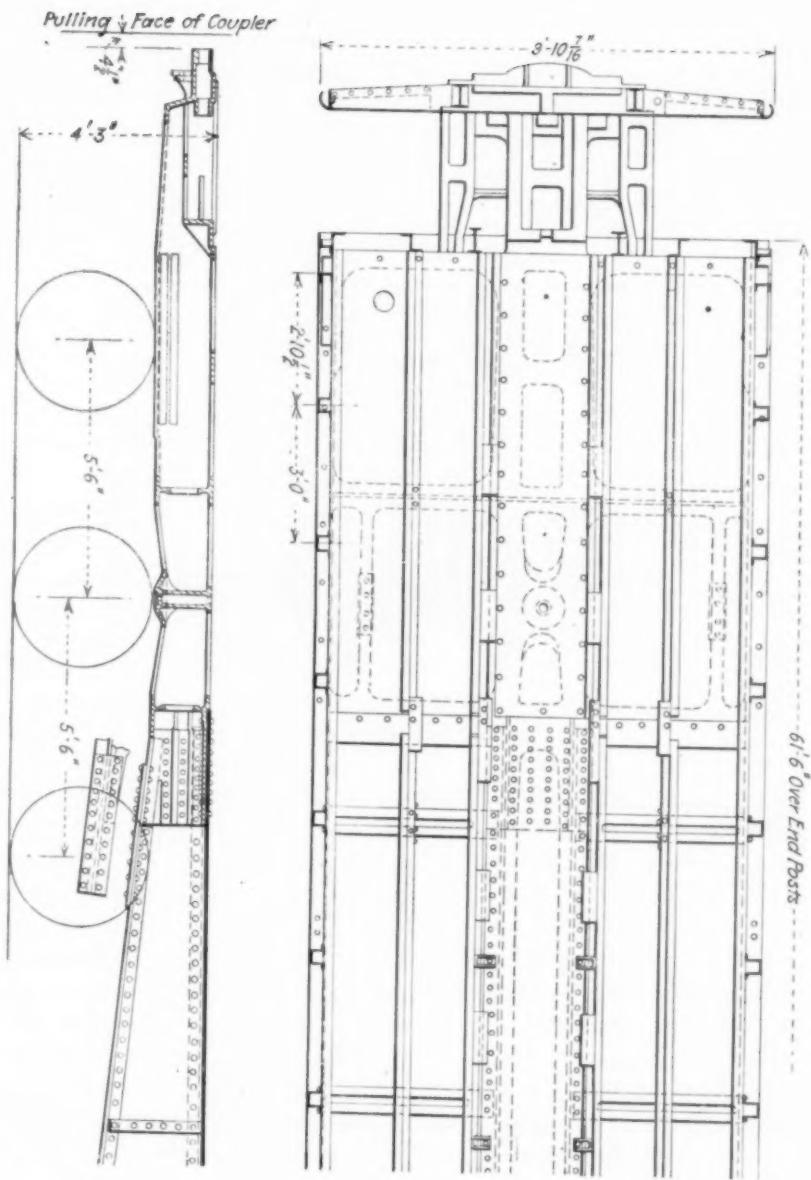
STEEL CAR TYPE, CENTER SILLS CONNECT AT BOLSTER WITH A STEEL CASTING
